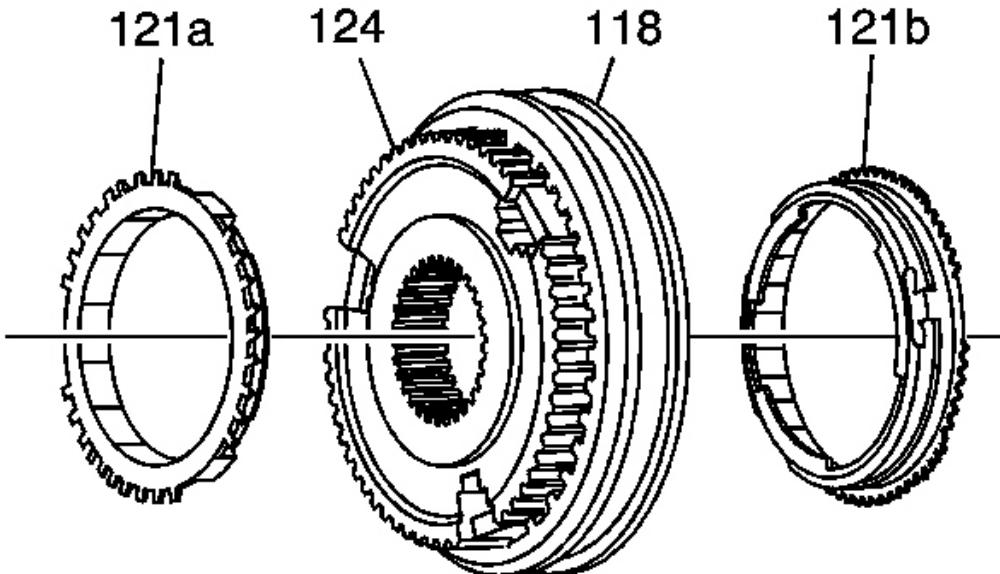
View Of 5th/6th Synchronizer Hub & Blocking Rings
